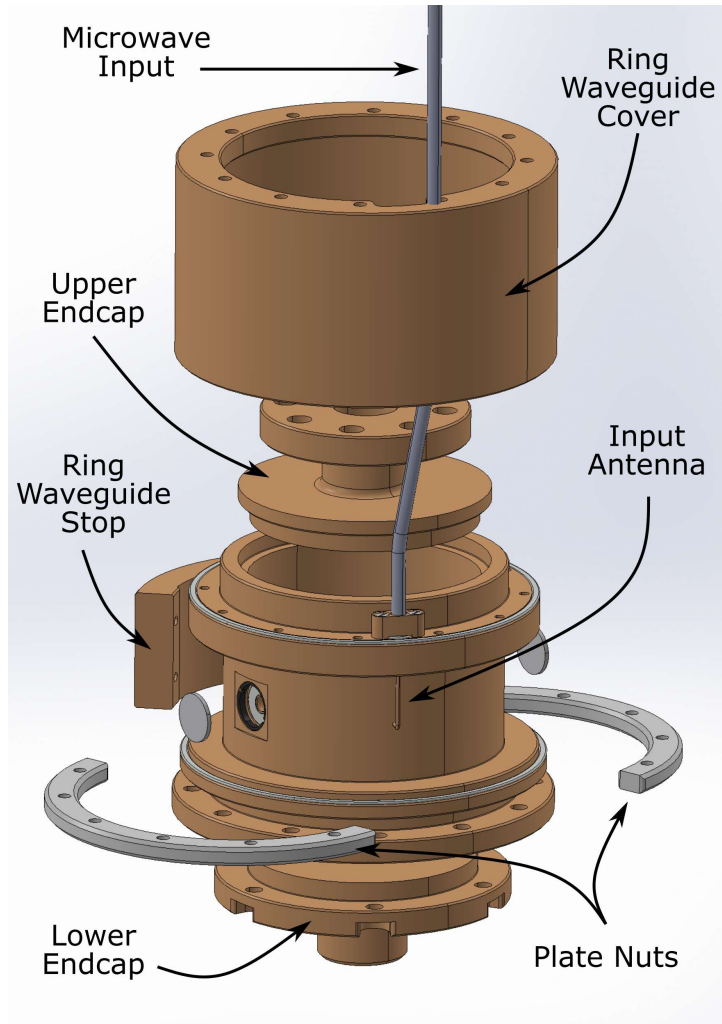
Exploded view of the cavity assembly with different parts labelled.
